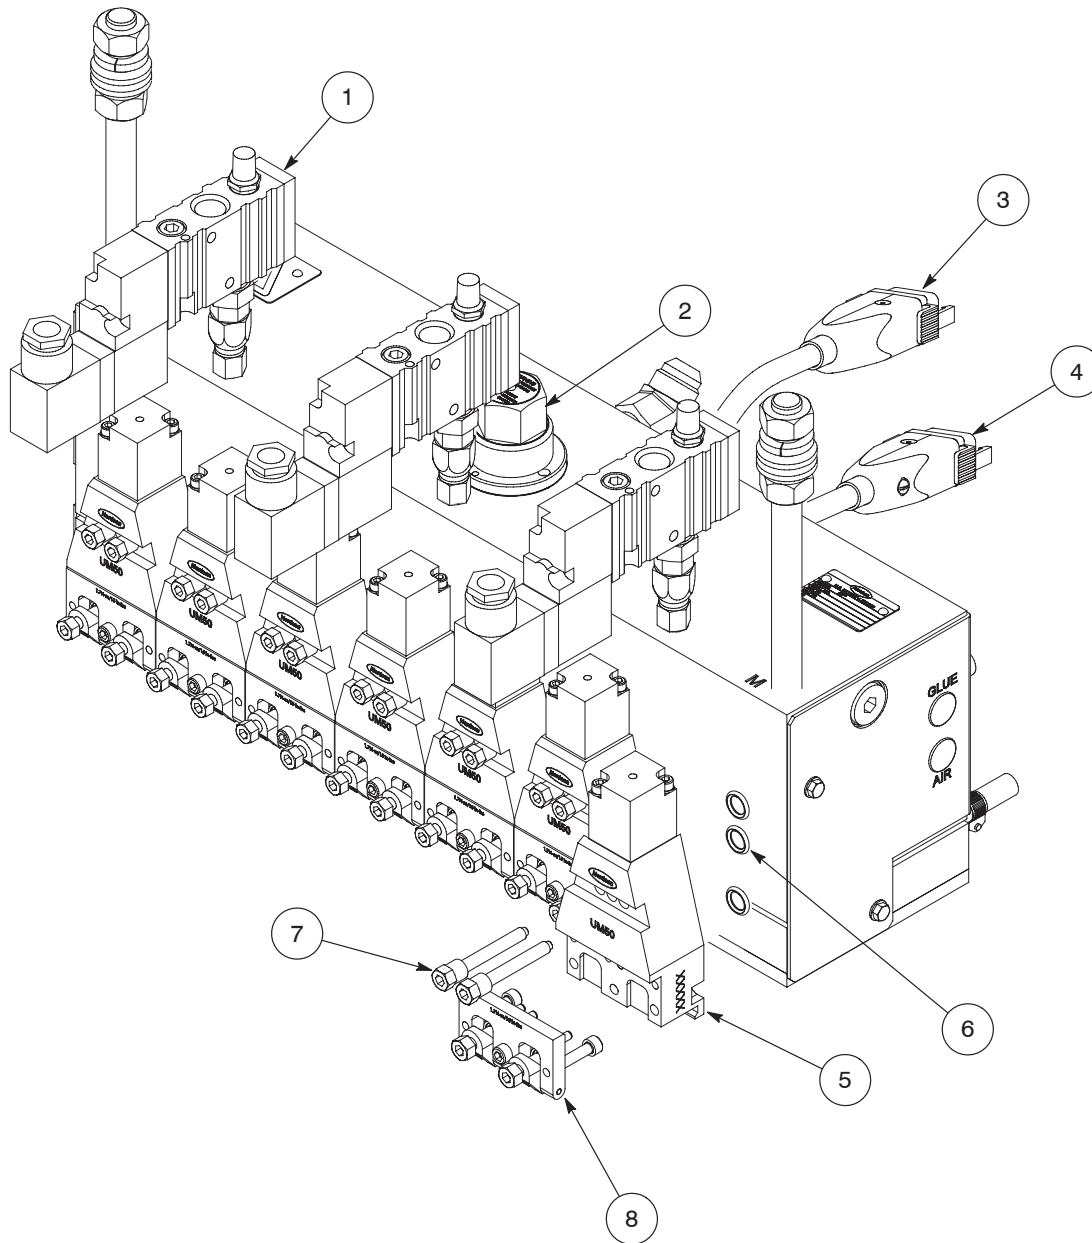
Applicator spare parts (standard adjustable UM50 modules shown)
